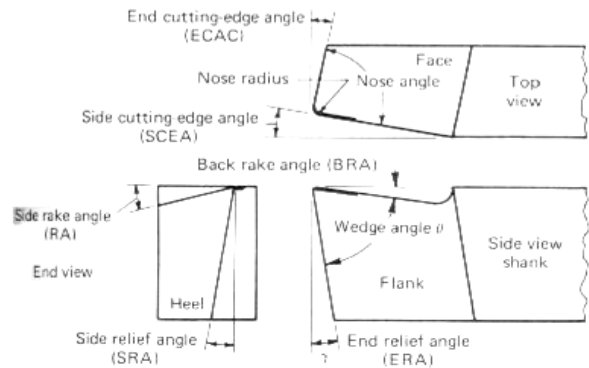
Single Point Cutting Tool Nomenclature (10)
